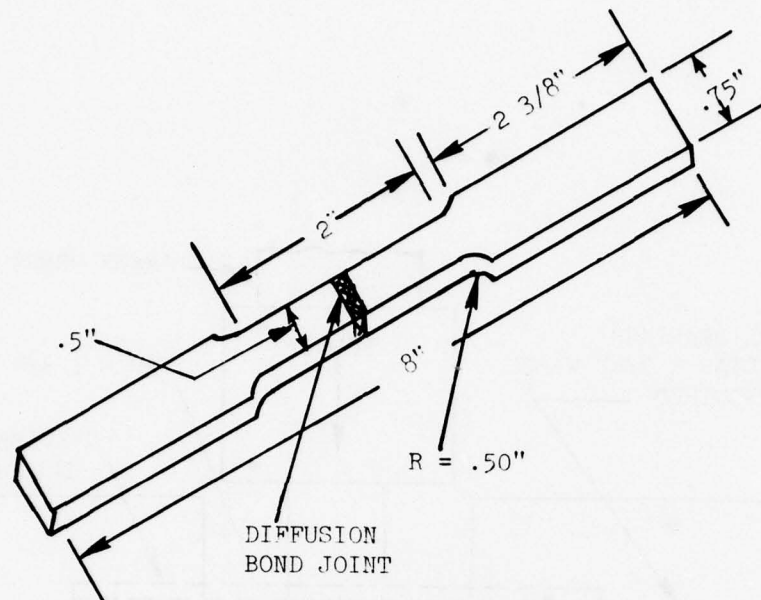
TENSILE TEST SPECIMEN CONFIGURATION.
